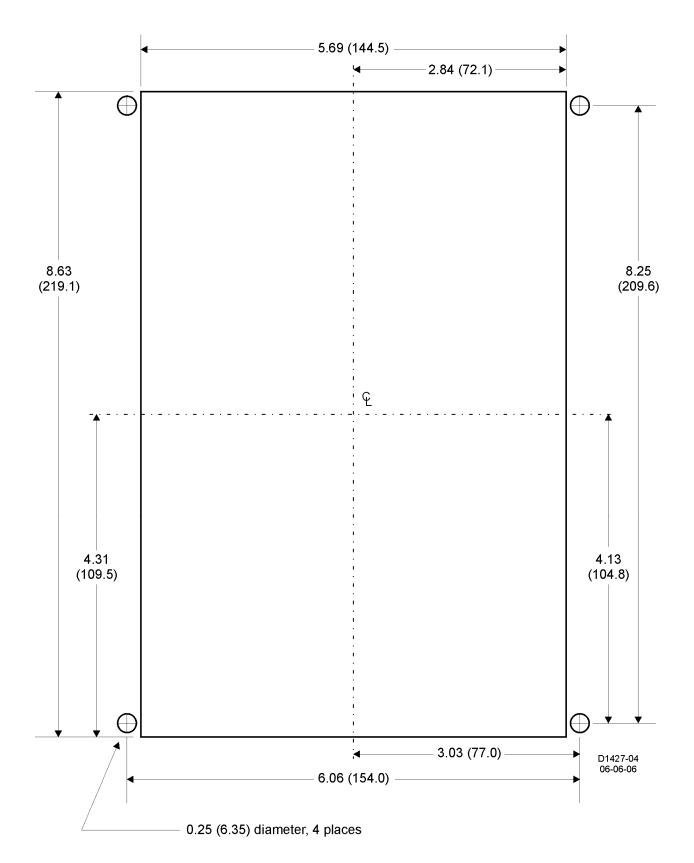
Panel Cutting and Drilling Dimensions, Semi-Flush Mounting, Double-Ended Case
